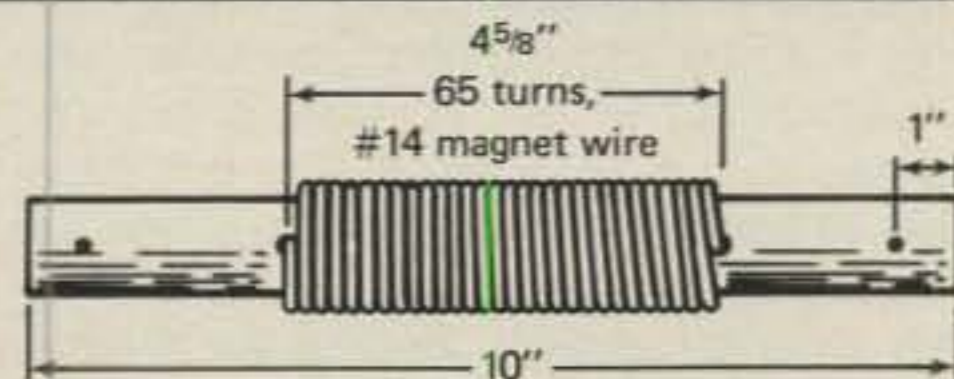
Dimensions and hole locations for the 80 meter coil and form. The coil is 3/4 inch PVC pipe, schedule 80.
